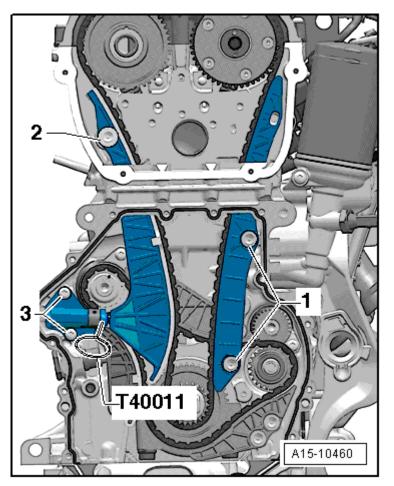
Identifying Camshaft Timing Chain Tensioner Bolts, Camshaft Timing Chain Guide Rail And Guide Pins Countersy of VOLKSWACEN UNITED STATES, INC
